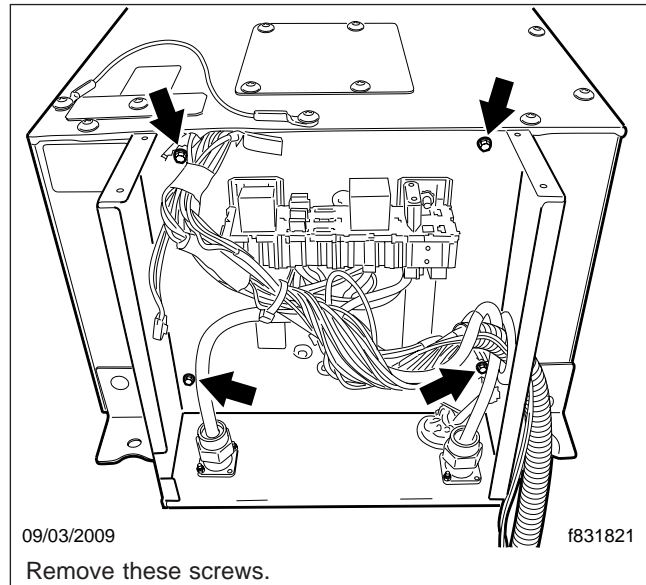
, Electrical Box, Frame-Rail Mounted Separator
